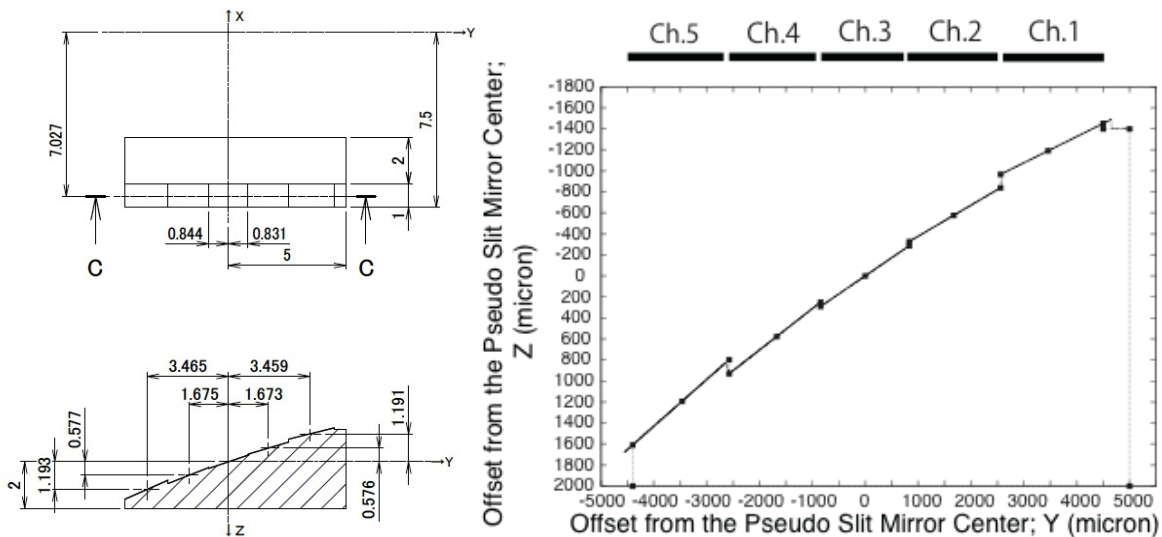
The left panels show the design drawing of the pseudo slit mirrors. Values are given in the units of mm. The right panel shows the sectional drawings along the C-C cut provided as a result of the 3-D shape measurement with NH-3N (shown with red solid line). The design level is shown by a dotted line with solid squares indicating the endpoints and the center of each pseudo slit mirror.
